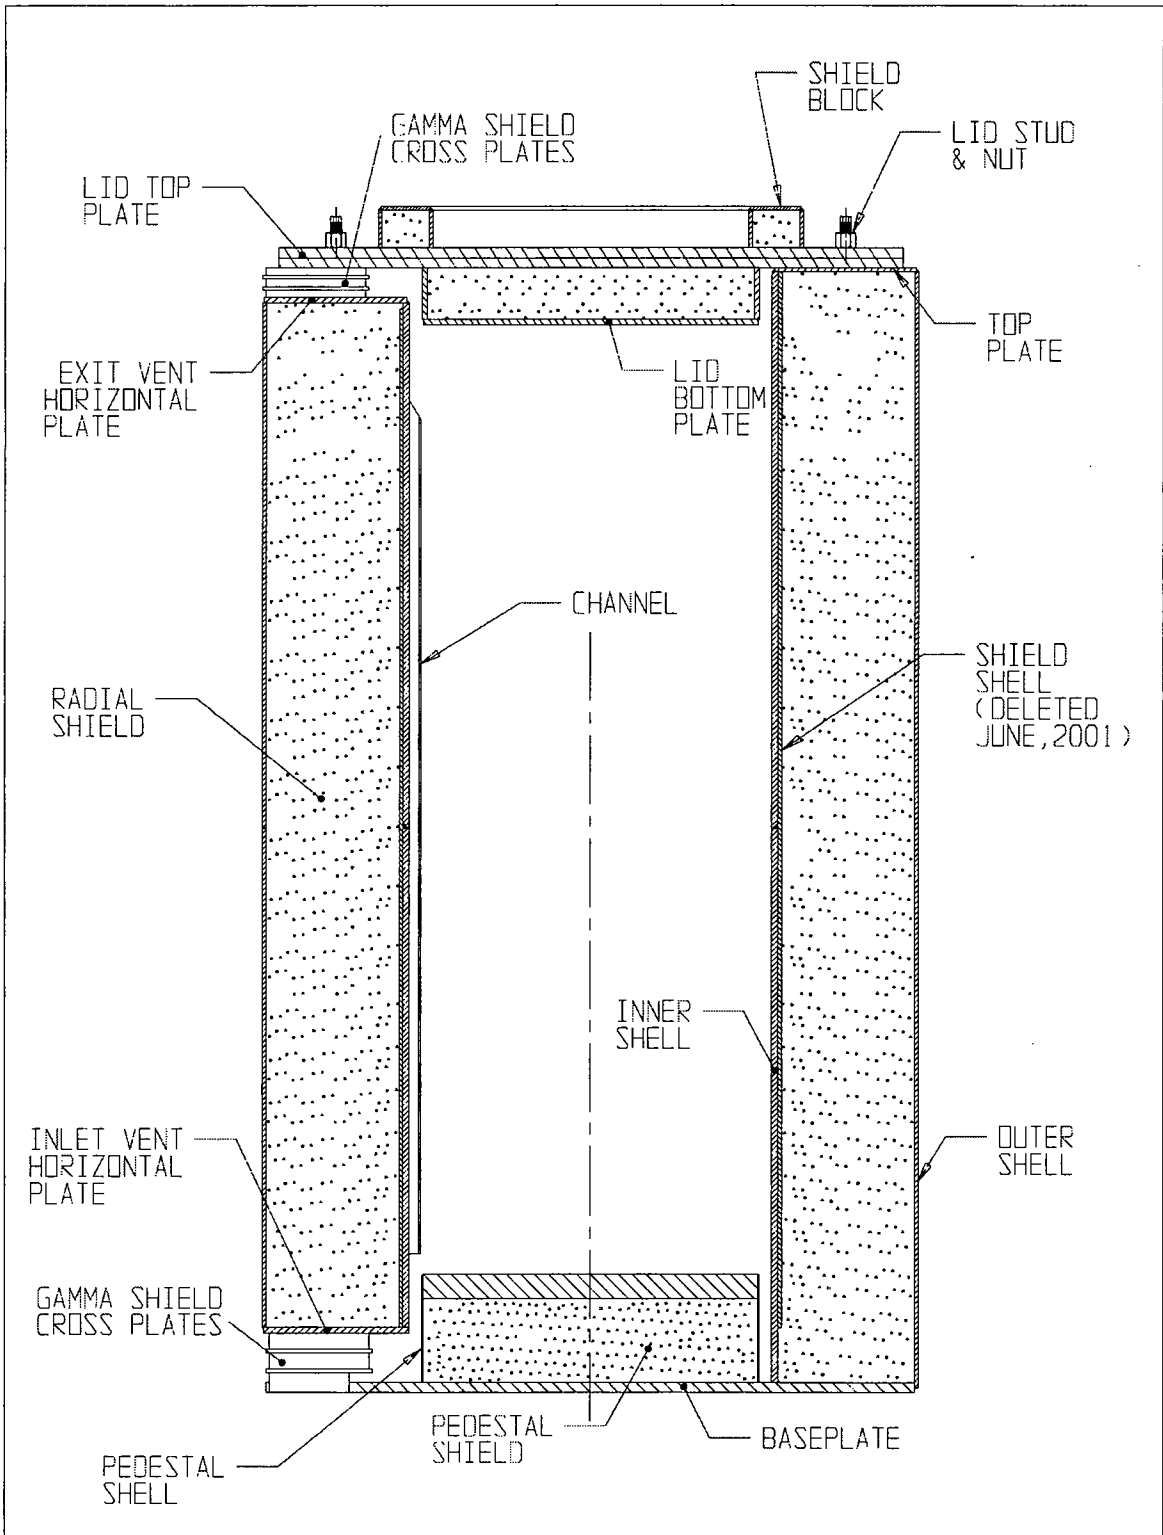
; HI-STORM 100 OVERPACK CROSS SECTIONAL ELEVATION VIEW
